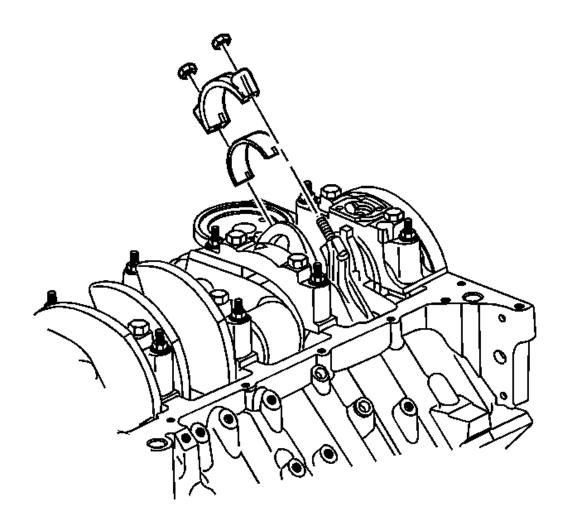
View Of Connecting Rod Cap & Connecting Rod Lower Bearing Courtesy of GENERAL MOTORS CORP.
